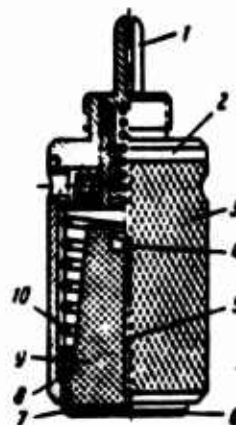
Combined searching head of type I-10 to echo-flaw detector V4-7I.
